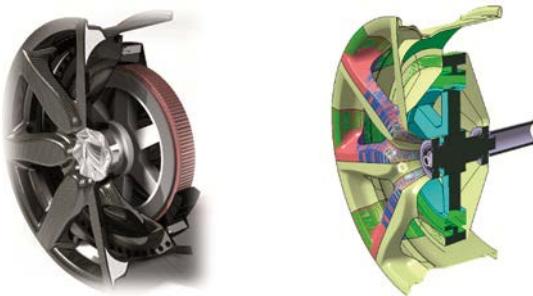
Wheel with Integrated Hub Motor (image courtesy of Fraunhofer)
